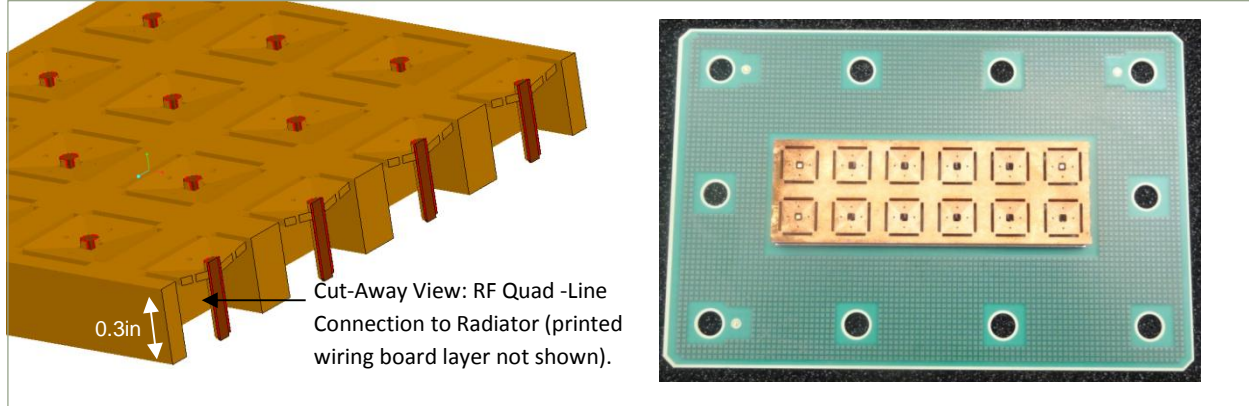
Gen 1.0 radiator and quad line feed assembly. Left: Pro-E model showing quad line; Right: fabricated 2x6 X-Band array
